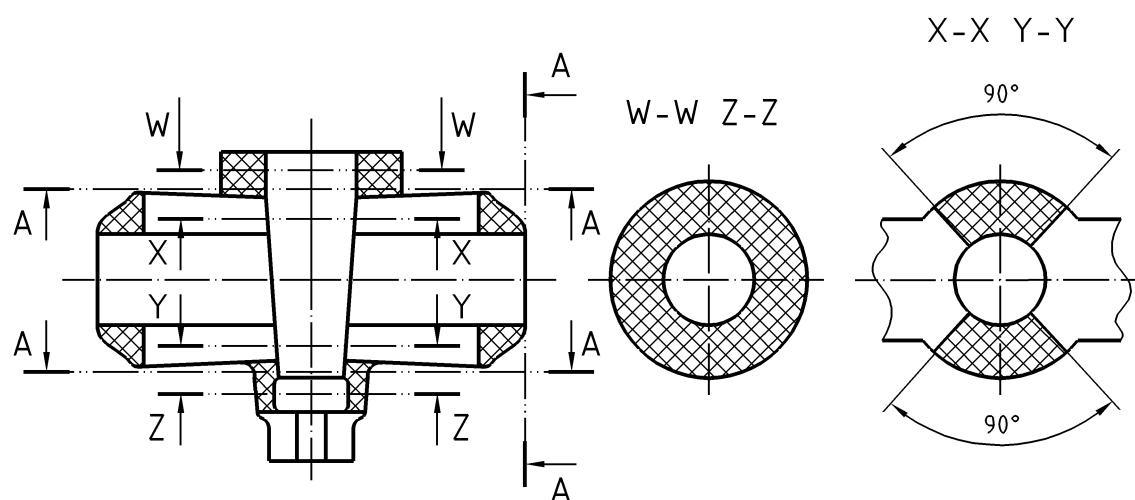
Typical casting section showing required radiographic examination of plug valve body
